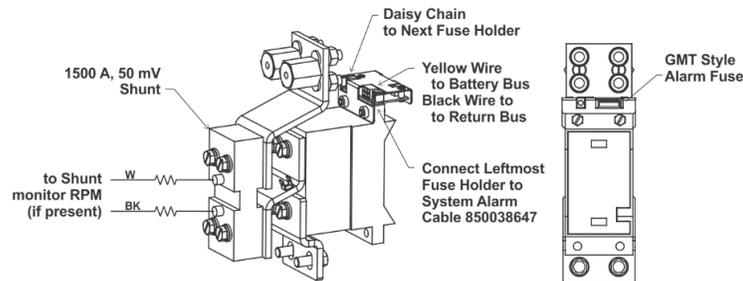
Bolt-in TPL-C Fuse Holder Wiring
